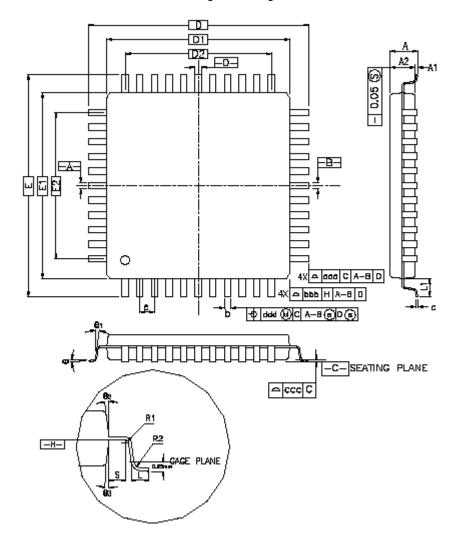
64- and 48-lead LQFP Package Drawing
